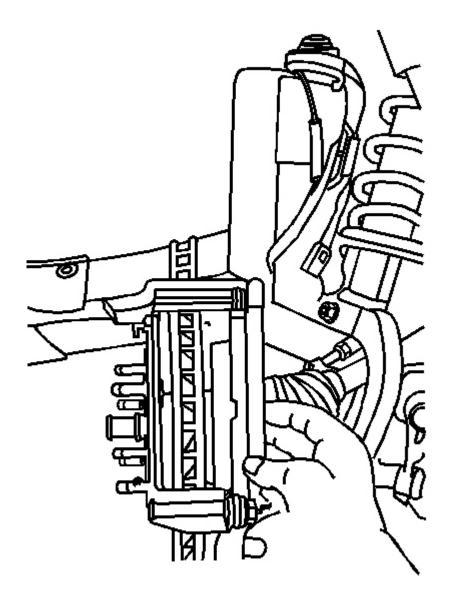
View Of Rotor & Caliper Courtesy of GENERAL MOTORS CORP.
